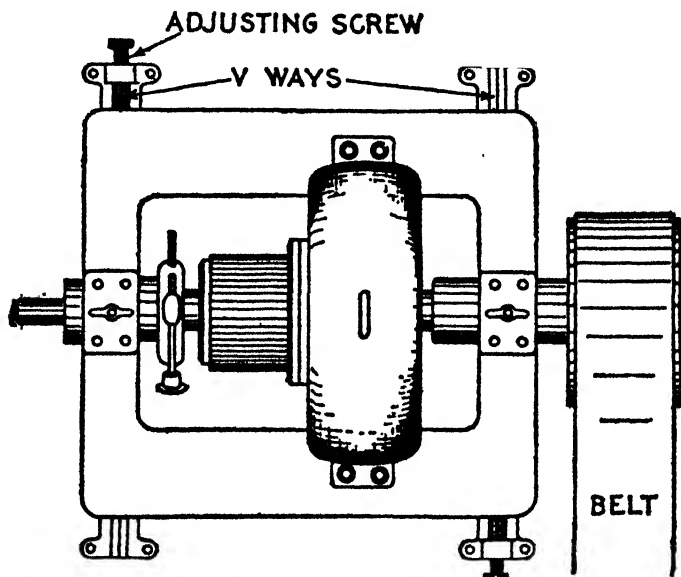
,822.—Plan of belt driven machine showing V ways and adjusting screws for moving the machine forward from the engine or counter shaft to take up slack in the belt.
